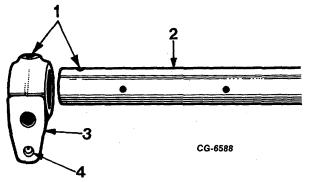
Aligning Holes in Rocker Arm Shaft and Support
